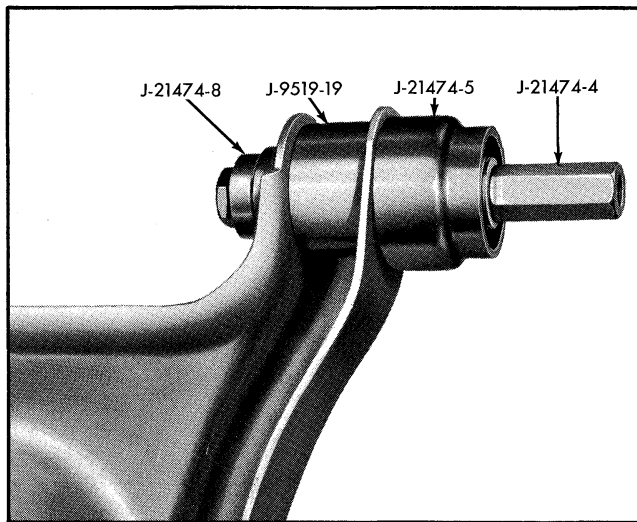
Removing Rear Bushing from Front Lower Control Arm
